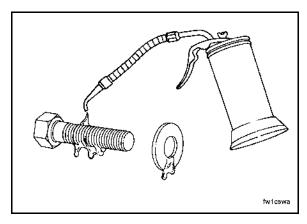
LUBRICATE CAPSCREW THREADS AND WASHER SURFACES
